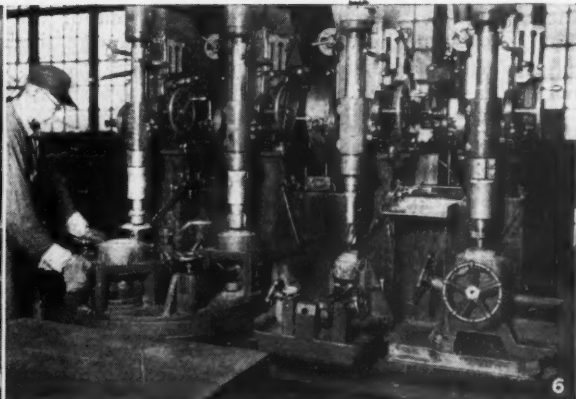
Dial gauge used on the grinding machines. No time is lost in gauging work and no shafts are ground undersize. Fig. 6—Barnes four-spindle drill equipped for boring connecting rods.
